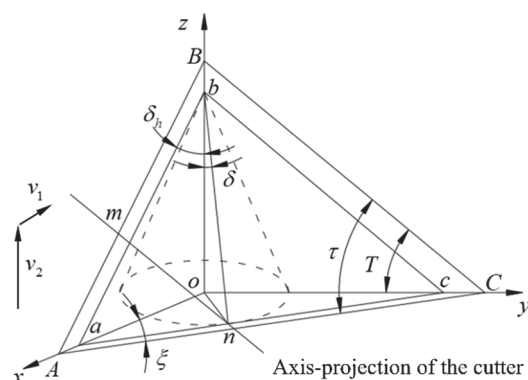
The relative position between the axis of the cutter and the gear blank. τ —the inclination angle of the cutter axis in the plane ABC; δ_f —the motion taper angle of the cutter.
